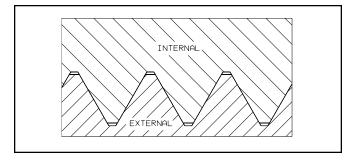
NPT: Wrench Tight-No Crest-Root Contact, Flank Contact Only
